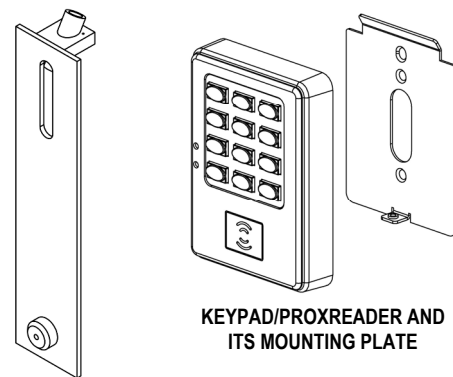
E: KEYPAD/PROXREADER MOUNTING PLATE
